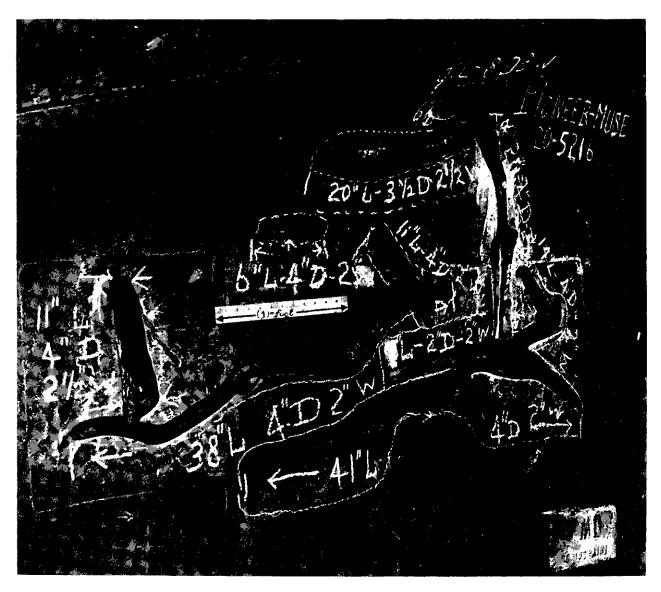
Cast steel "Mariner" rudder horn showing metal removal in way of fractures
